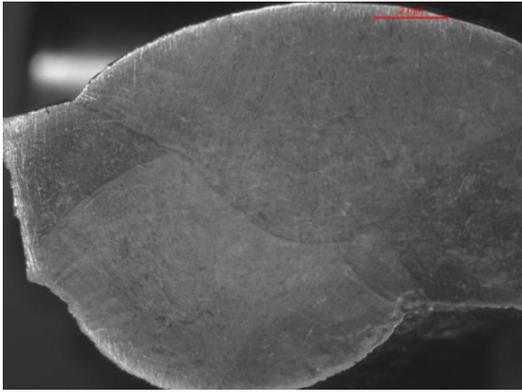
Weld region showing weld misalignment as well as weld defect (LOF)
